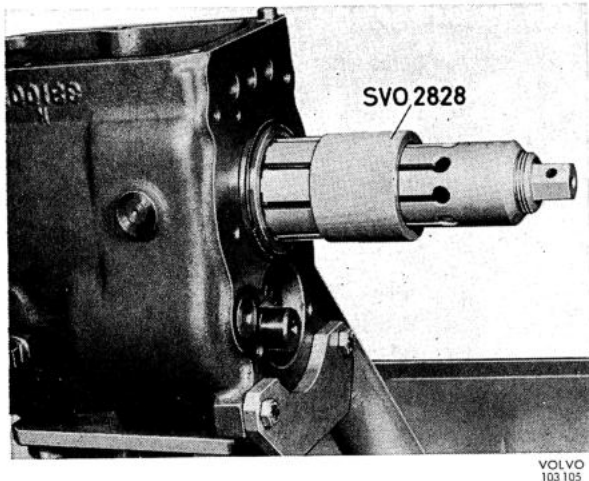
Removing the mainshaft rear bearing, M 400
